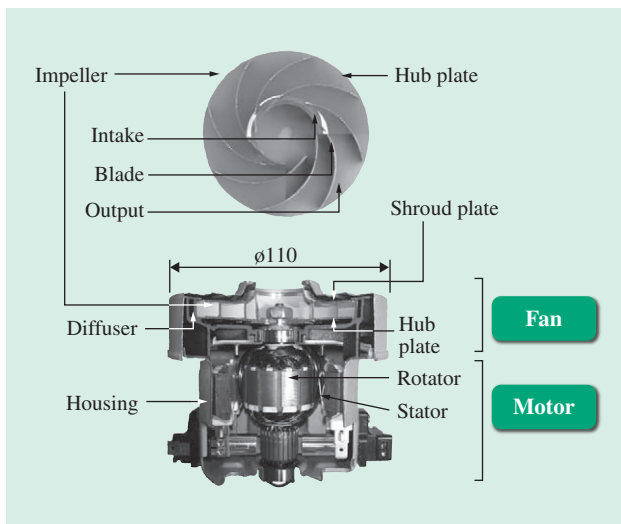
Fan Motor Cross-section and Impeller. Light weight is achieved by changing the housing material from steel plate to aluminum.
